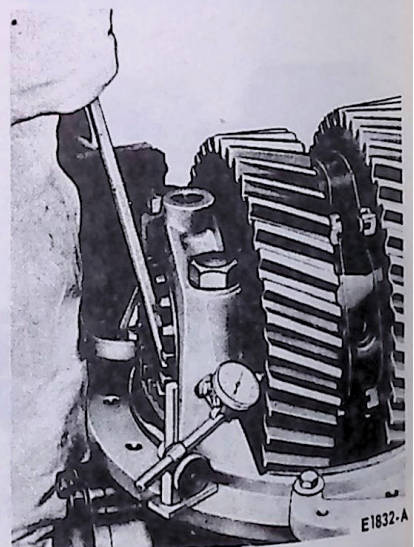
Adjusting Typical Differential Bearing Pre-Load
